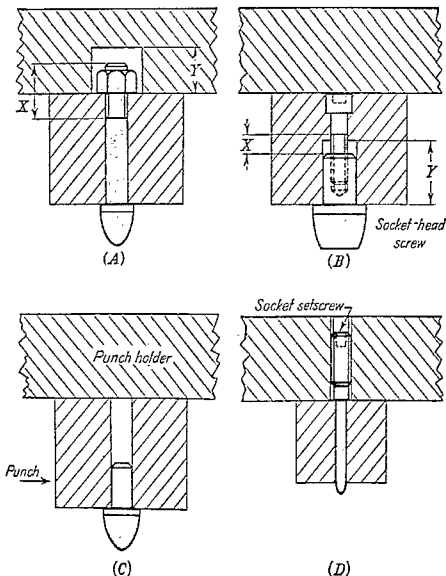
Methods of retaining pilots: (A) threaded shank; (B) screw-retained; (C) press-fit; (D), socket setscrew.
